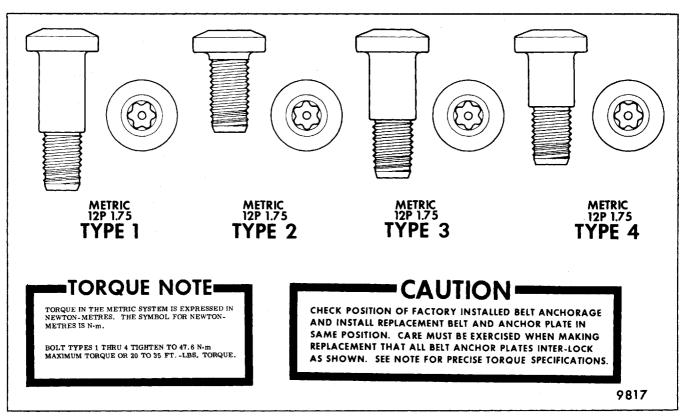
Front Seat Lap and Shoulder Belt Anchor Bolts - A Styles
